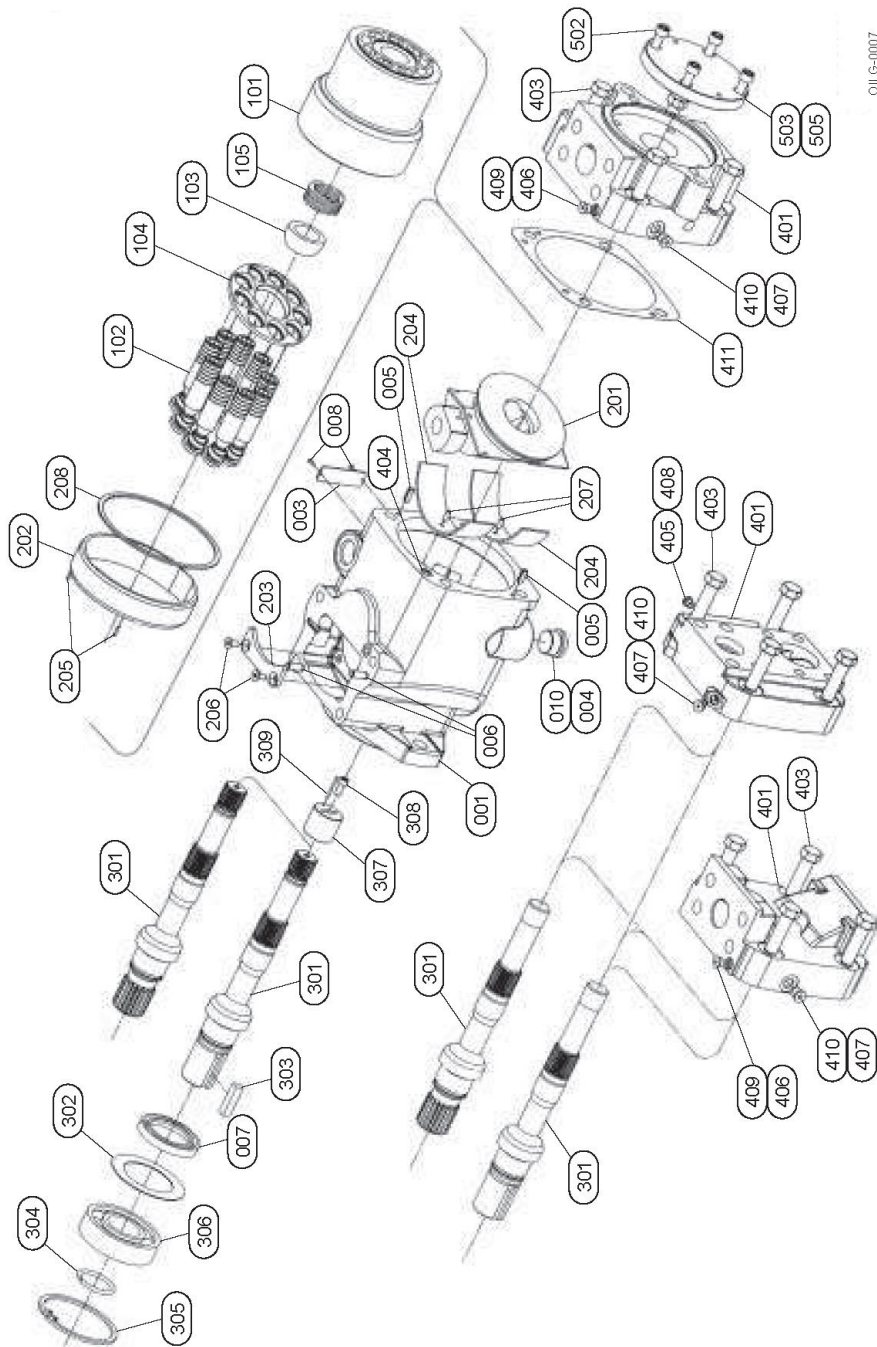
Exploded parts drawing, PVG 100/130 (516246 sheet 2 of 3).
